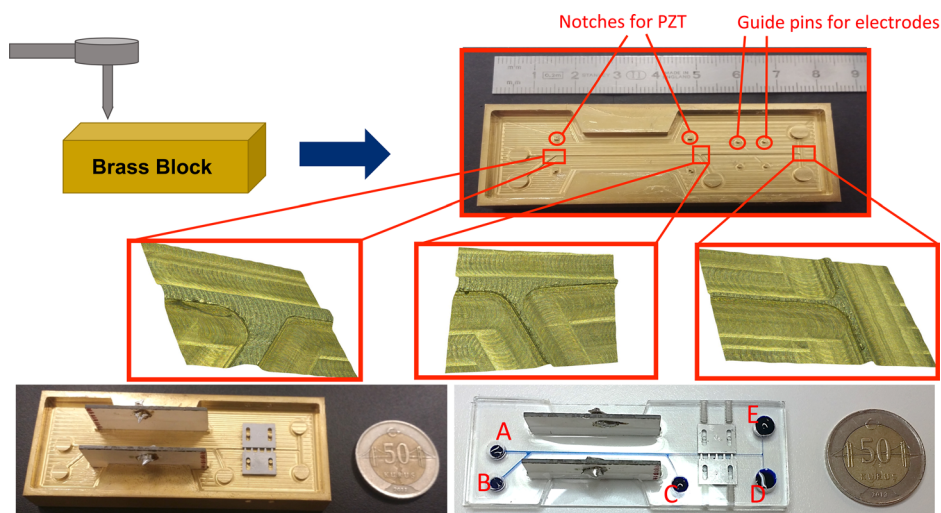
Fabricated brass mold, PZT actuators and electrode assembly, and the final device.
